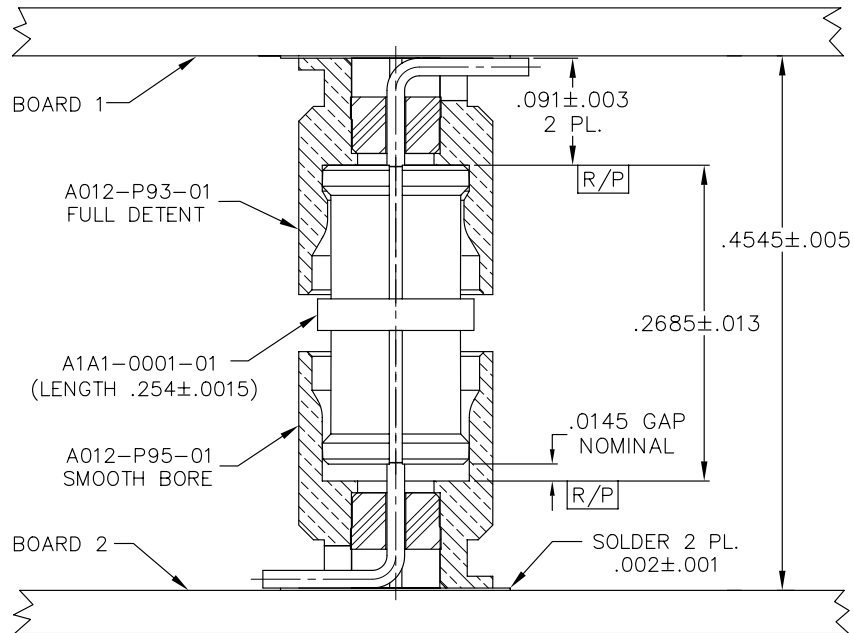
GPO Board-to-Board Tolerance Analysis
